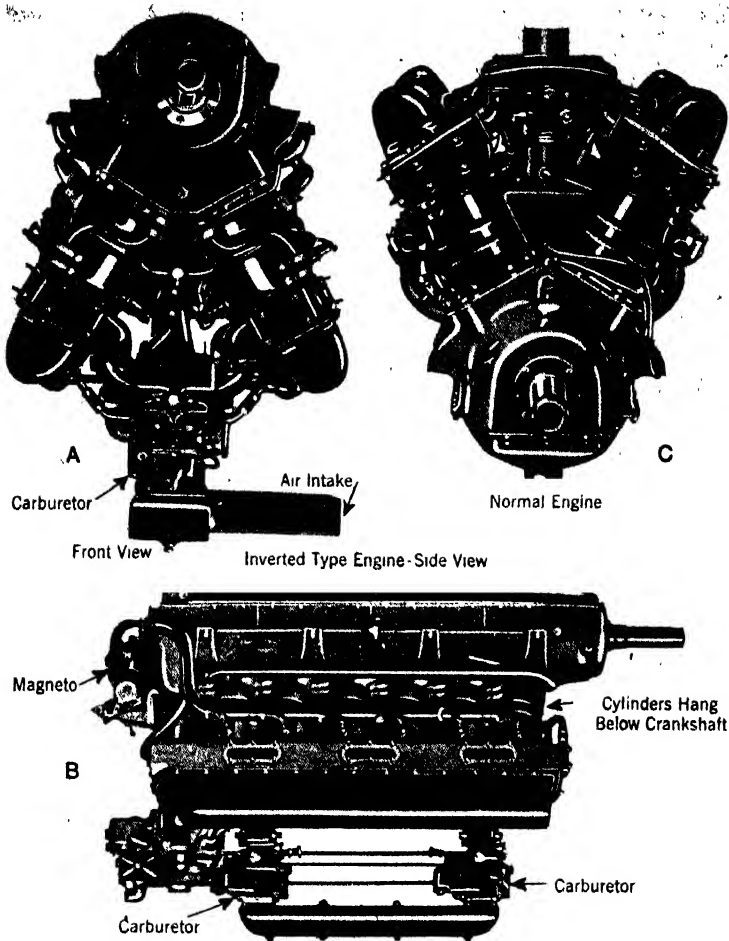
Views of Packard 2A 1500 Aircraft Engine of the Inverted Type Shown at A and B. Compare Carburetor Location with that Shown at C, which is Front End of the Same Engine Used in the Conventional Manner.
